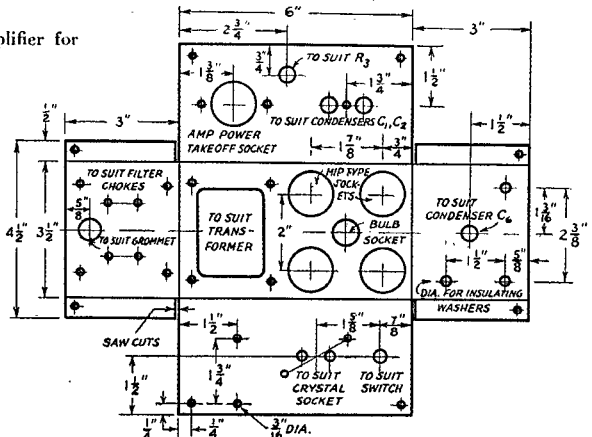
Chassis dimensions for the "Tom Thumb" transmitter-receiver showing the location of the various components.
